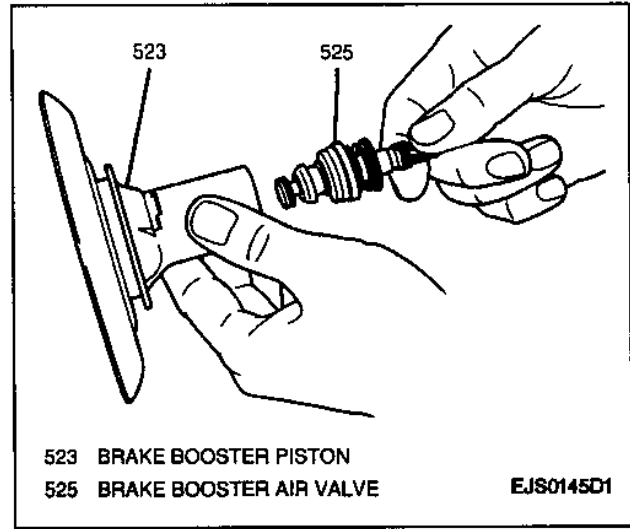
Removing Brake Booster Air Valve From Brake Booster Piston
